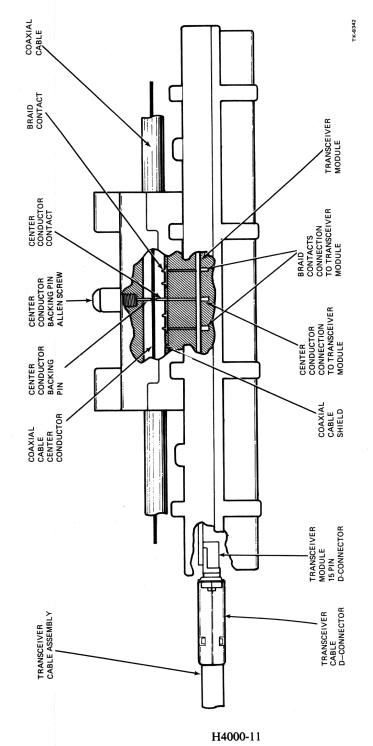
H4000 Ethernet Transceiver: Cutaway View Showing Coaxial Cable Interface
